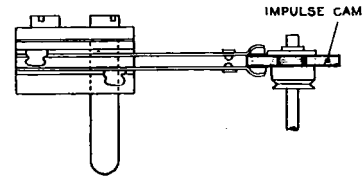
IMPULSE SPRING ASSEMBLY.
